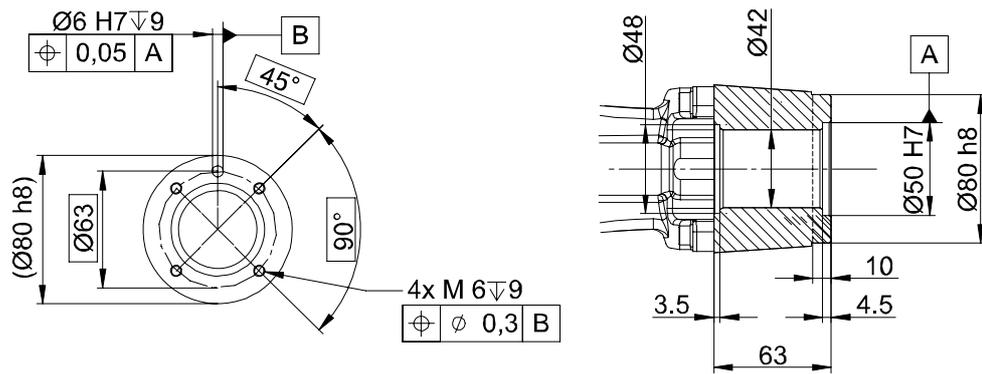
Robot tool flange for IRB 1600ID-4/1.5 (dimensions in mm).
